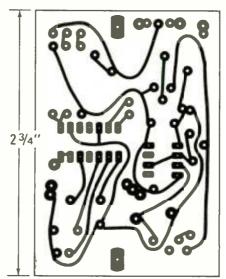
FOIL PATTERN for the main PC board shown full size.
